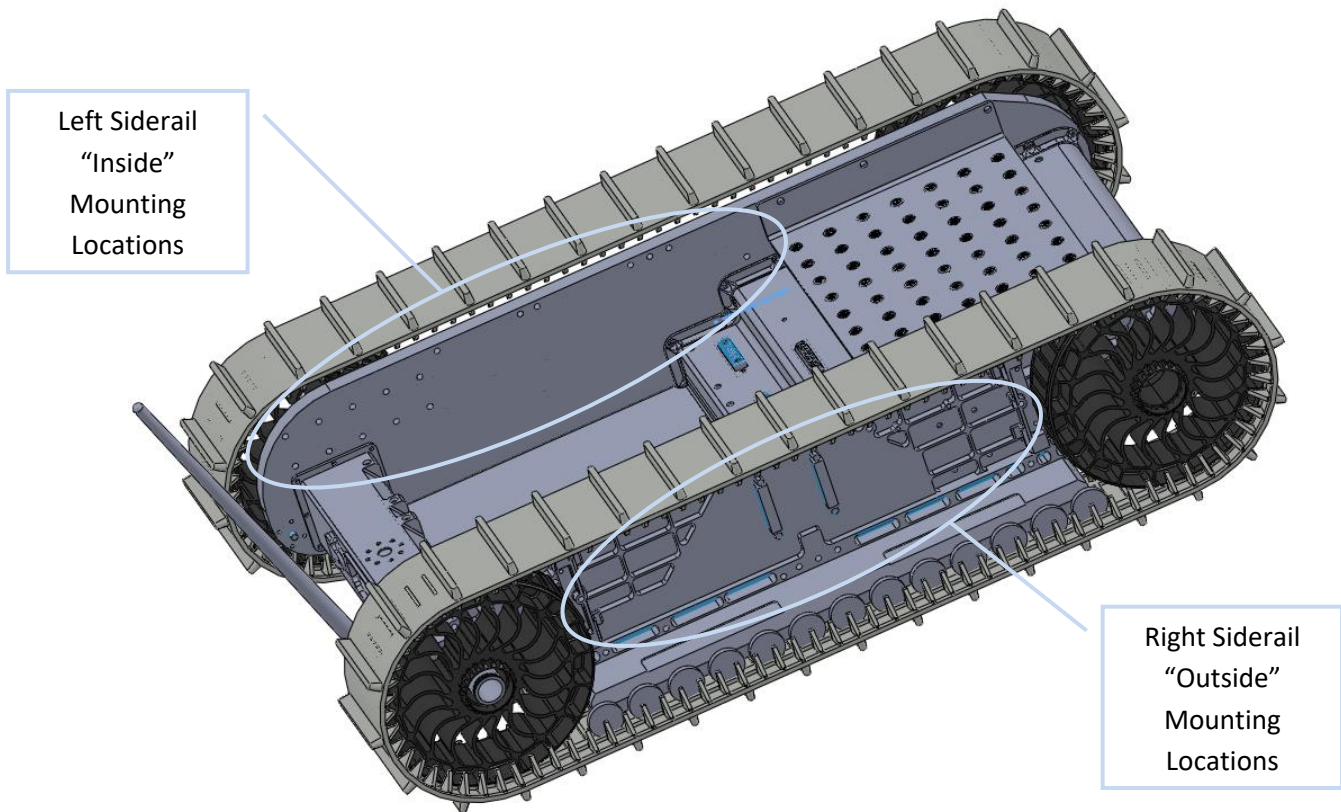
View of Mounting Holes from Right Side of Vehicle
